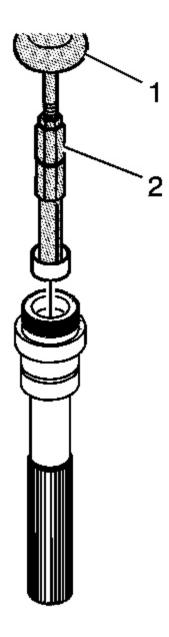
Removing Mainshaft Rear Support Bushing From Rear Output Shaft Using J 2619-01 & J 45548
